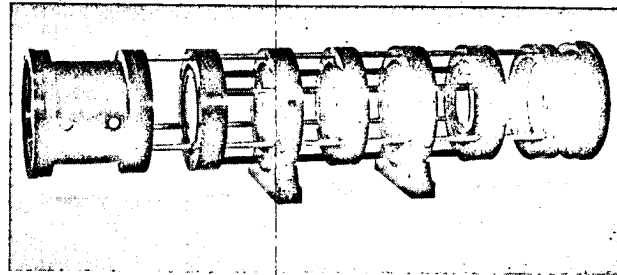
Prototype of five-component optically compensated zoom lens with auxiliary end components (housing removed).
